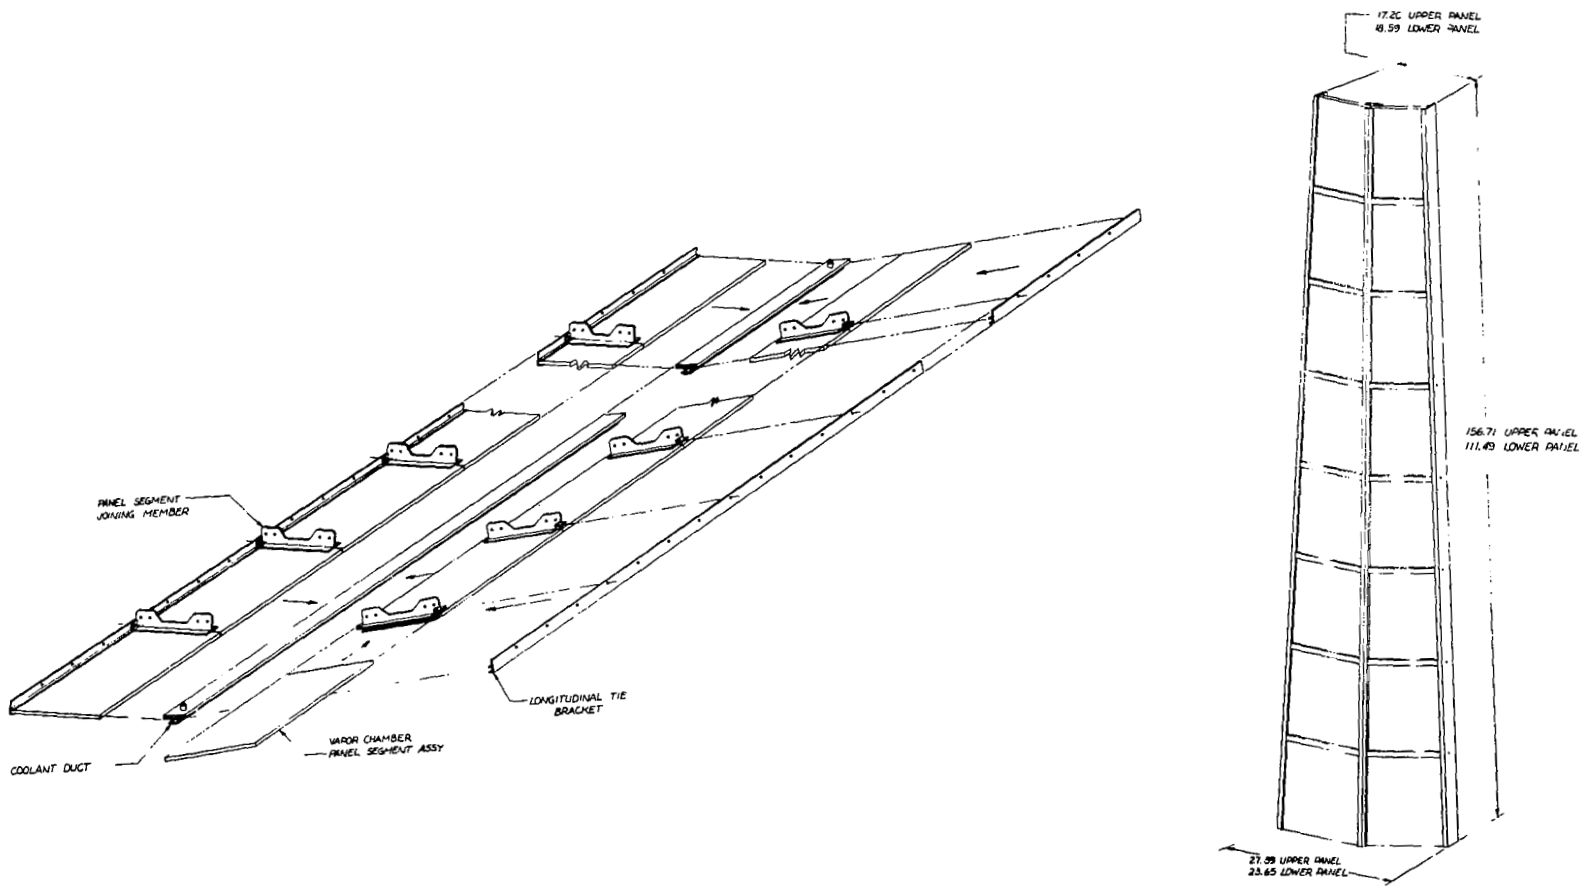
Vapor Chamber Panel Subassembly - Alternative 2 (Step 3)
